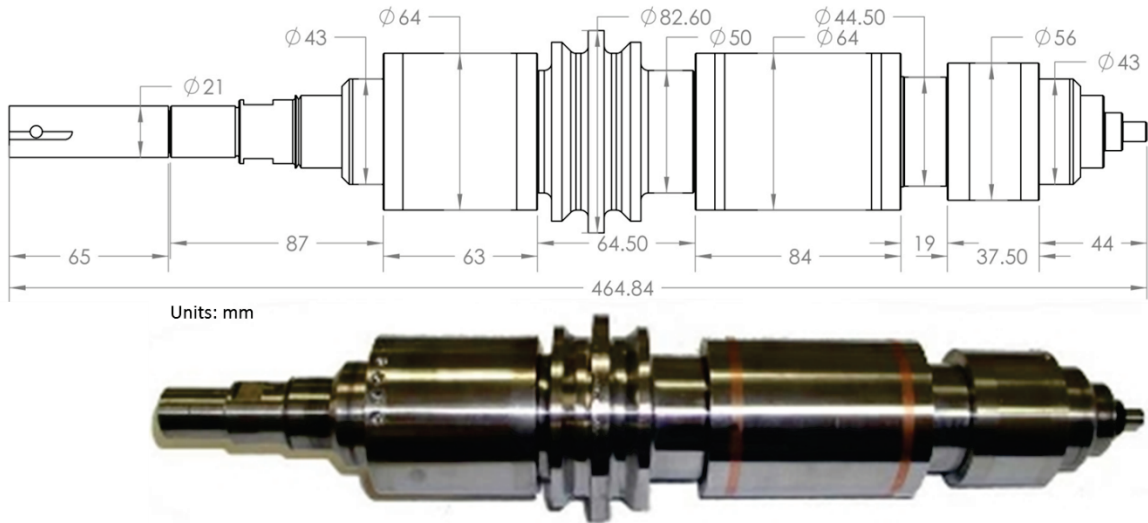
Basic dimensions and photo of the rotor (65 mm tool holder not shown in photo).
